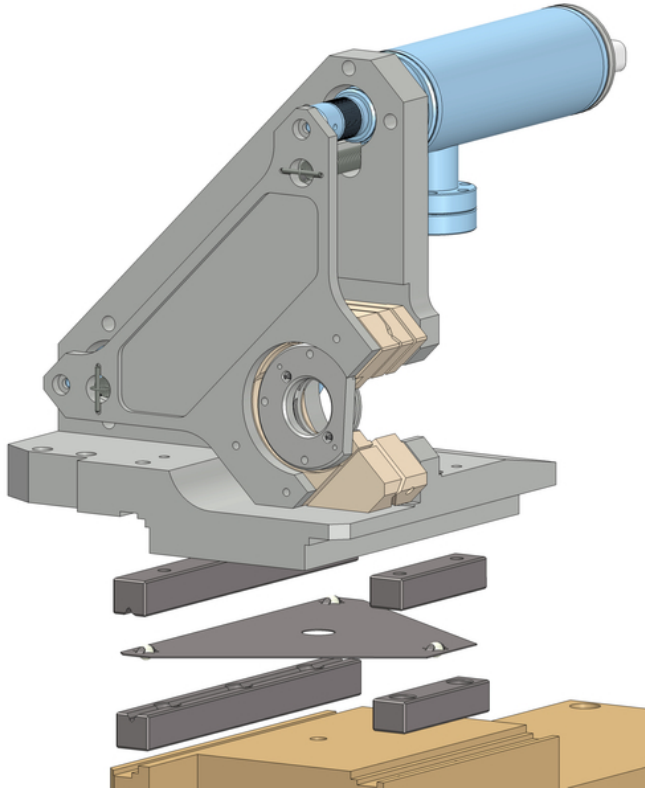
Technical drawing of a spherical mirror mounting system. The longitudinal translation stage, made of three ceramic balls, two guiding rails and a triangular plate is shown as an exploded view.
